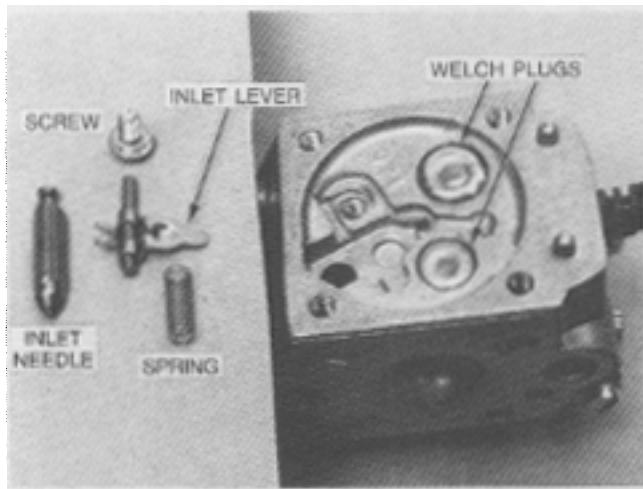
The inlet lever is under spring tension. Remove inlet lever assembly very carefully to prevent loss of spring or other parts.
